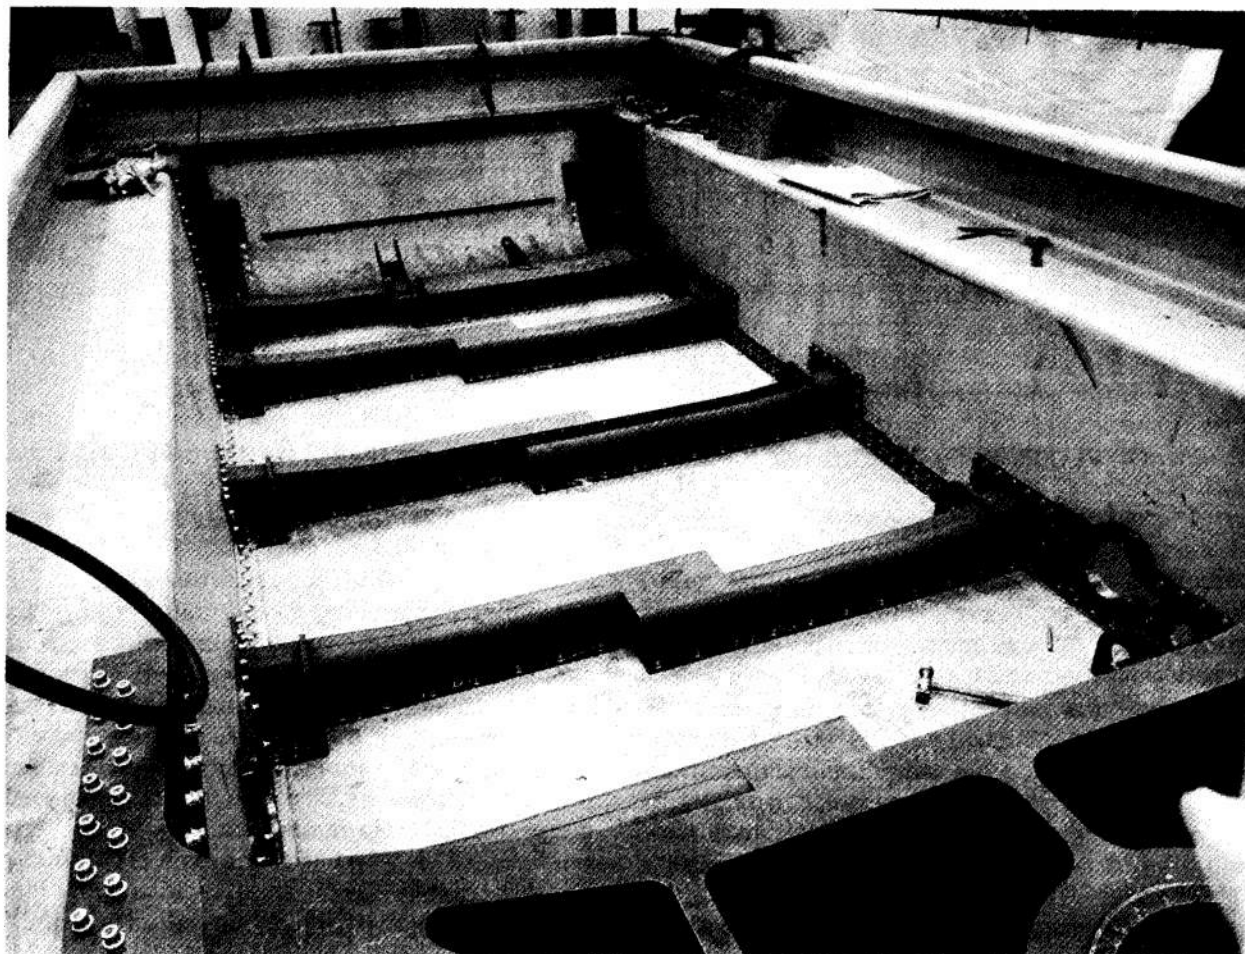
Typical Floor and Wall Construction, M48 Tank
